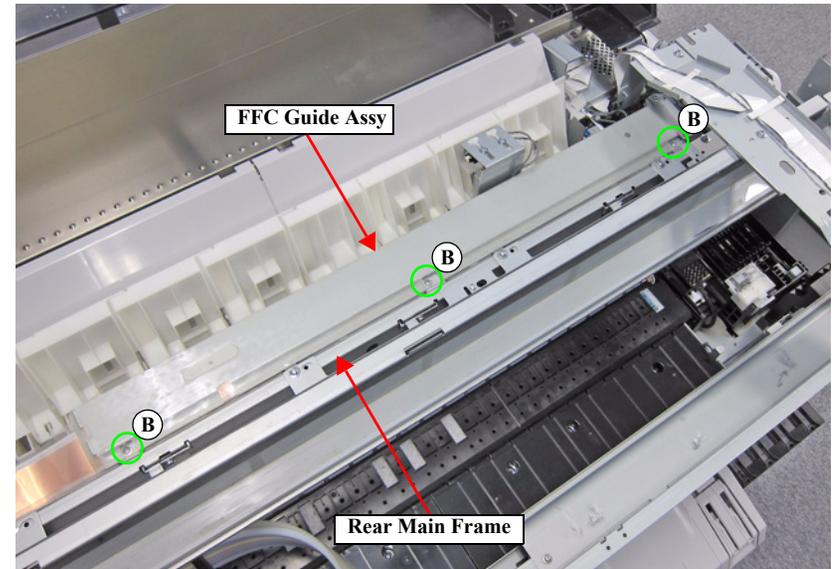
Removing the CR FFC (Top of the Rear Main Frame)
